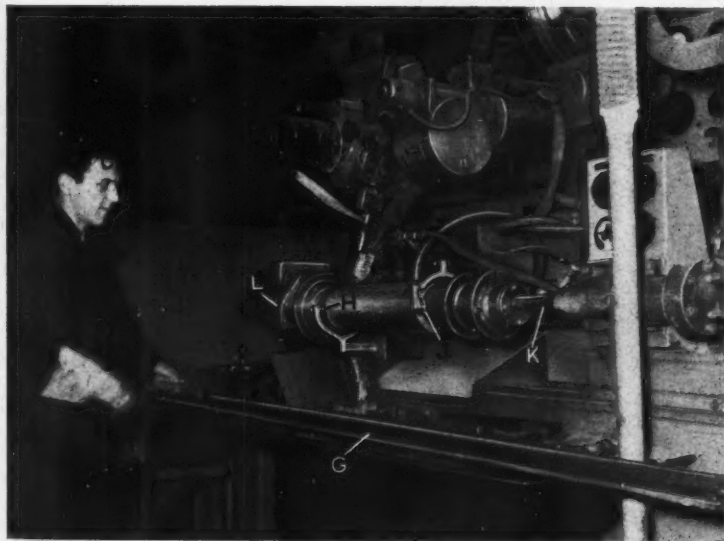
At this set-up for welding the guard-tubes to the outer tubes, on another A.E.I., Ltd., machine, the guard-tube is located automatically by the air-operated rollers H and J, before welding is begun
